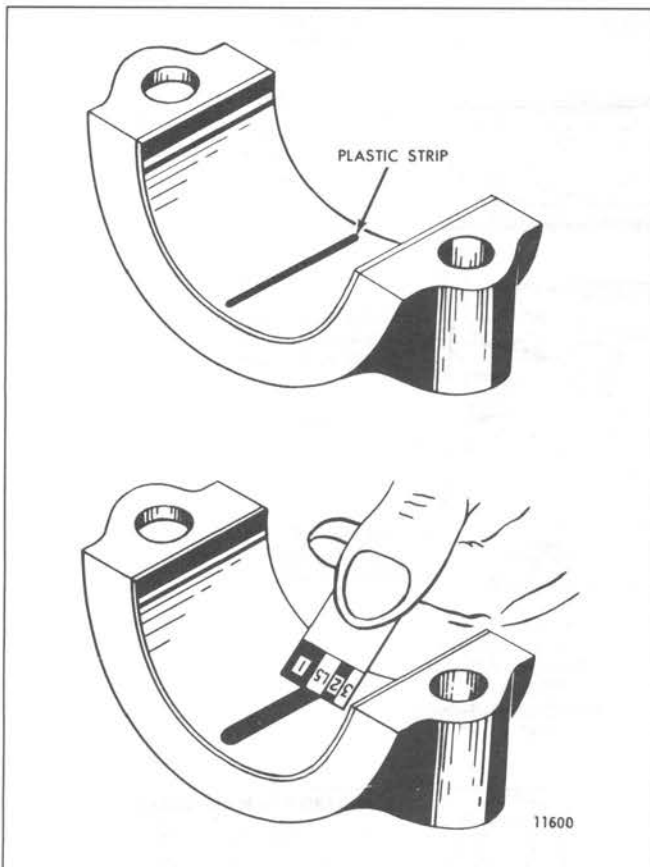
Using Plastic Strip to Measure Bearing-to-Crankshaft Clearance
